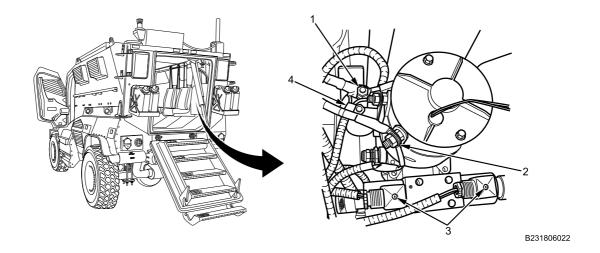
Hydraulic Pump and Valve Assembly Electrical Connections.
